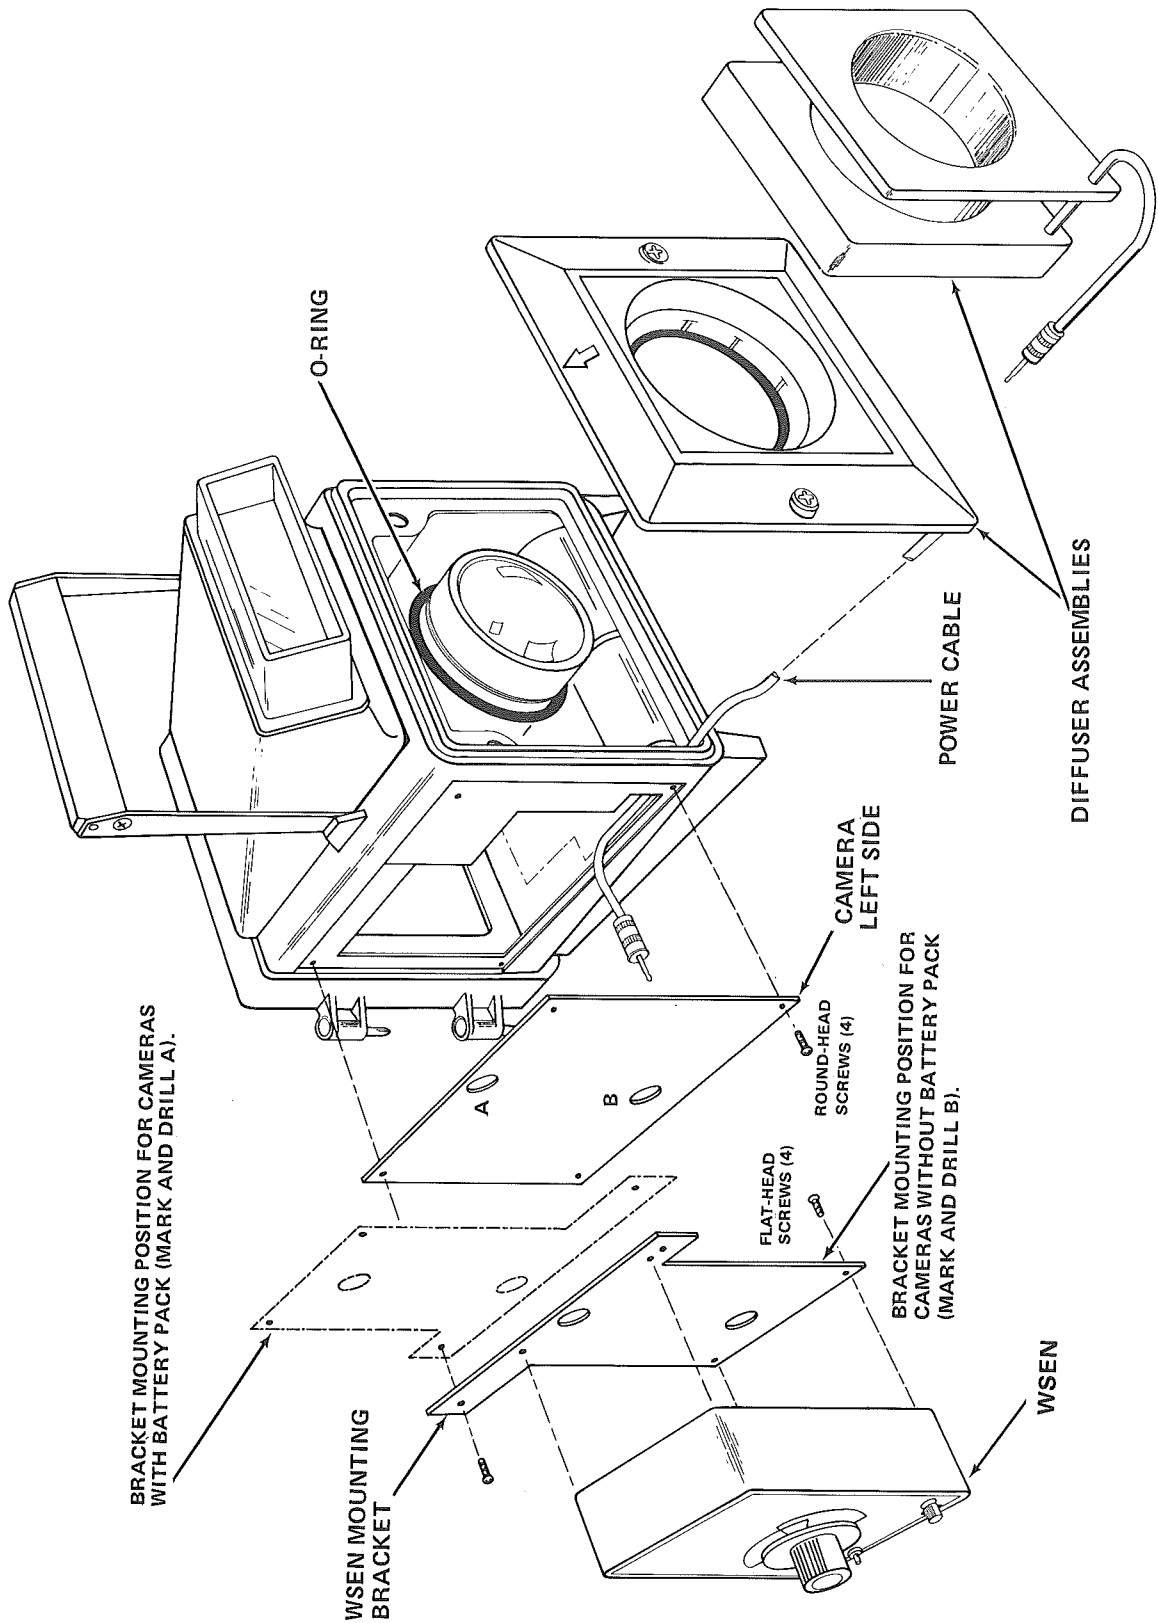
Typical installation C-50, C-51, C-53 and C-59 Cameras.
